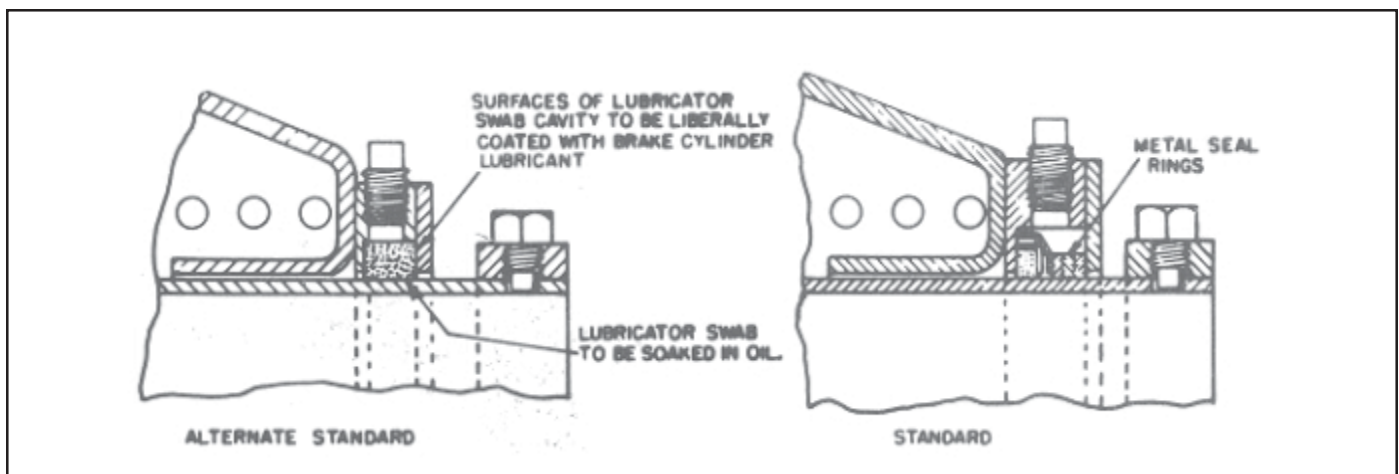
When Converting from Standard to Alternate Standard Arrangement, Remove Swab, Retainer and Metal Seal Rings and Apply Lubricator Swab
